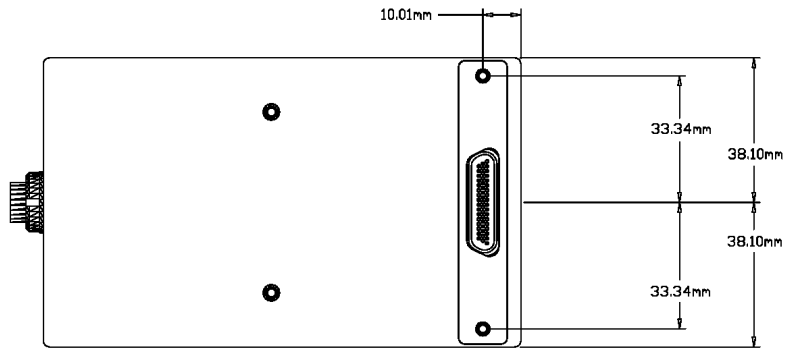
ETKS3.0_SET Dimensions - Bottom View
